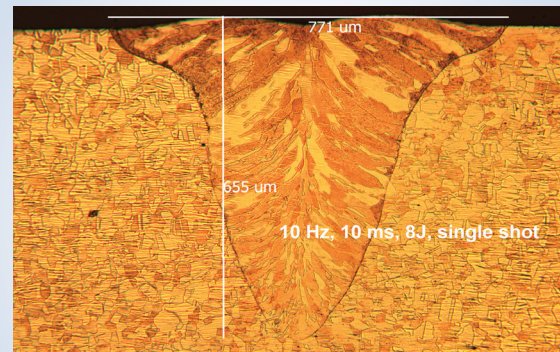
Single Shot Spot Weld 304 Stainless Steel, Multi-mode Feed Fiber
